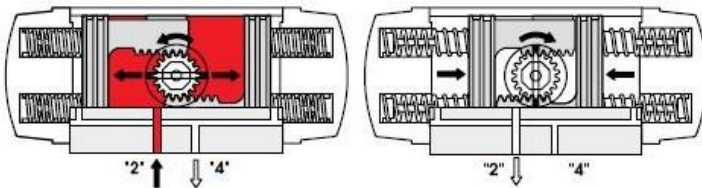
Top view and principle of a single acting actuator under spring pressure
